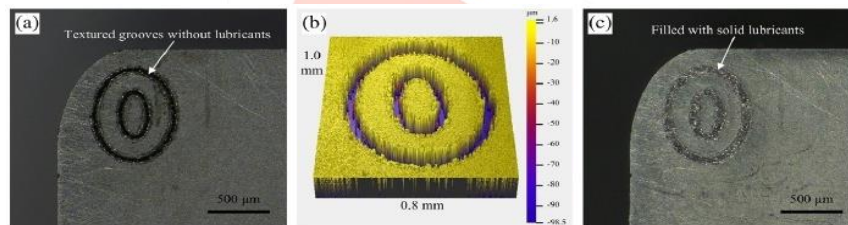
Morphology of textured grooves on rake face of cutting tool: (a) textured grooves without lubricants, (b) stereoscopic profile of textured grooves and (c) textured grooves filled with solid lubricants[21]
